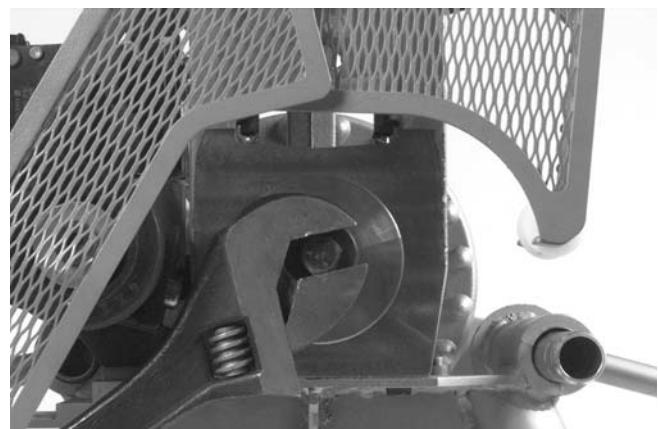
Loosening The $\frac{5}{8}$ " Draw Bolt
